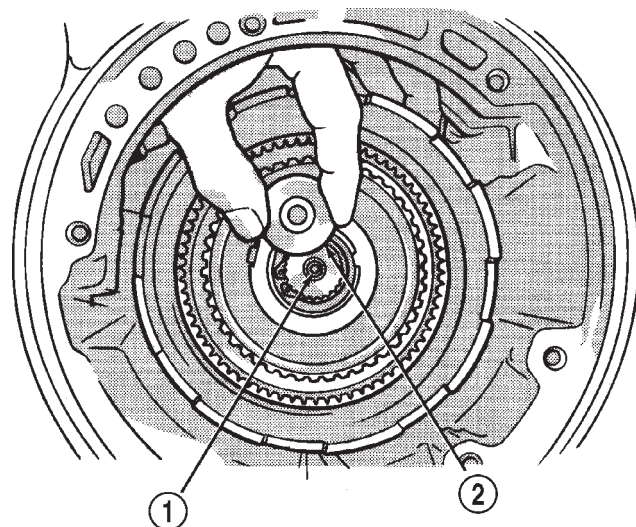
Installing Low-Reverse Drum Retaining Snap-Ring
